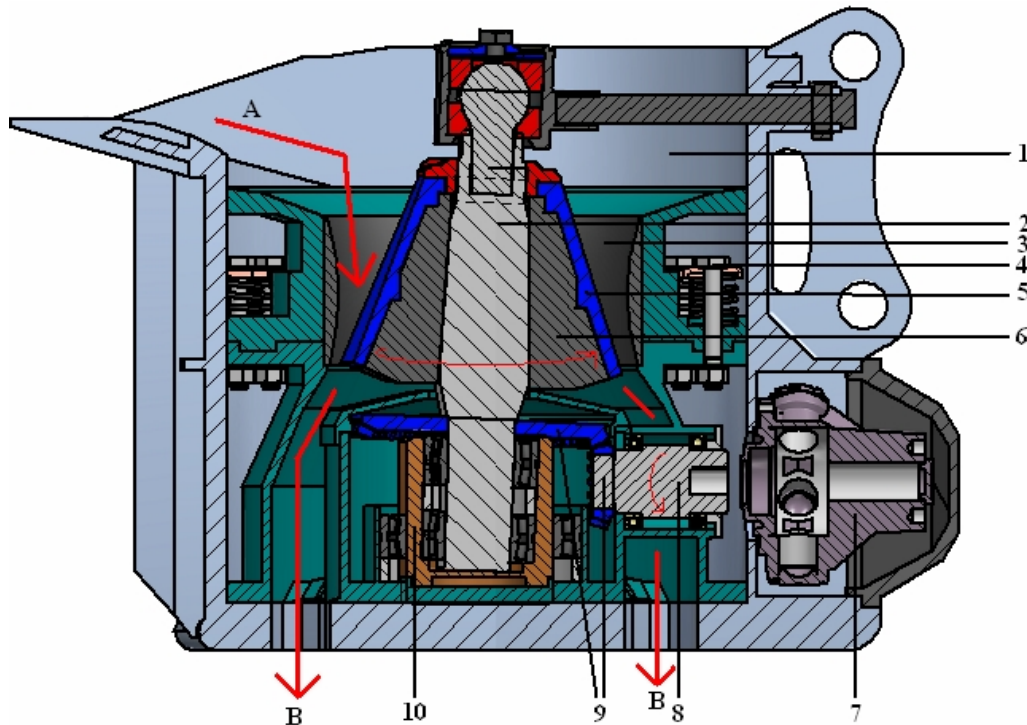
Description of kinematic scheme : 1-bucket body, 2-vertical axis, 3-fixed armor, 4-elastic elements, 5-armoured mobile cone, 6-mobile cone, 7- rotary hydraulic engine, 8-drive shaft conical group, 9- conical group, 10- assembled box, A-supply, B-evacuation.
